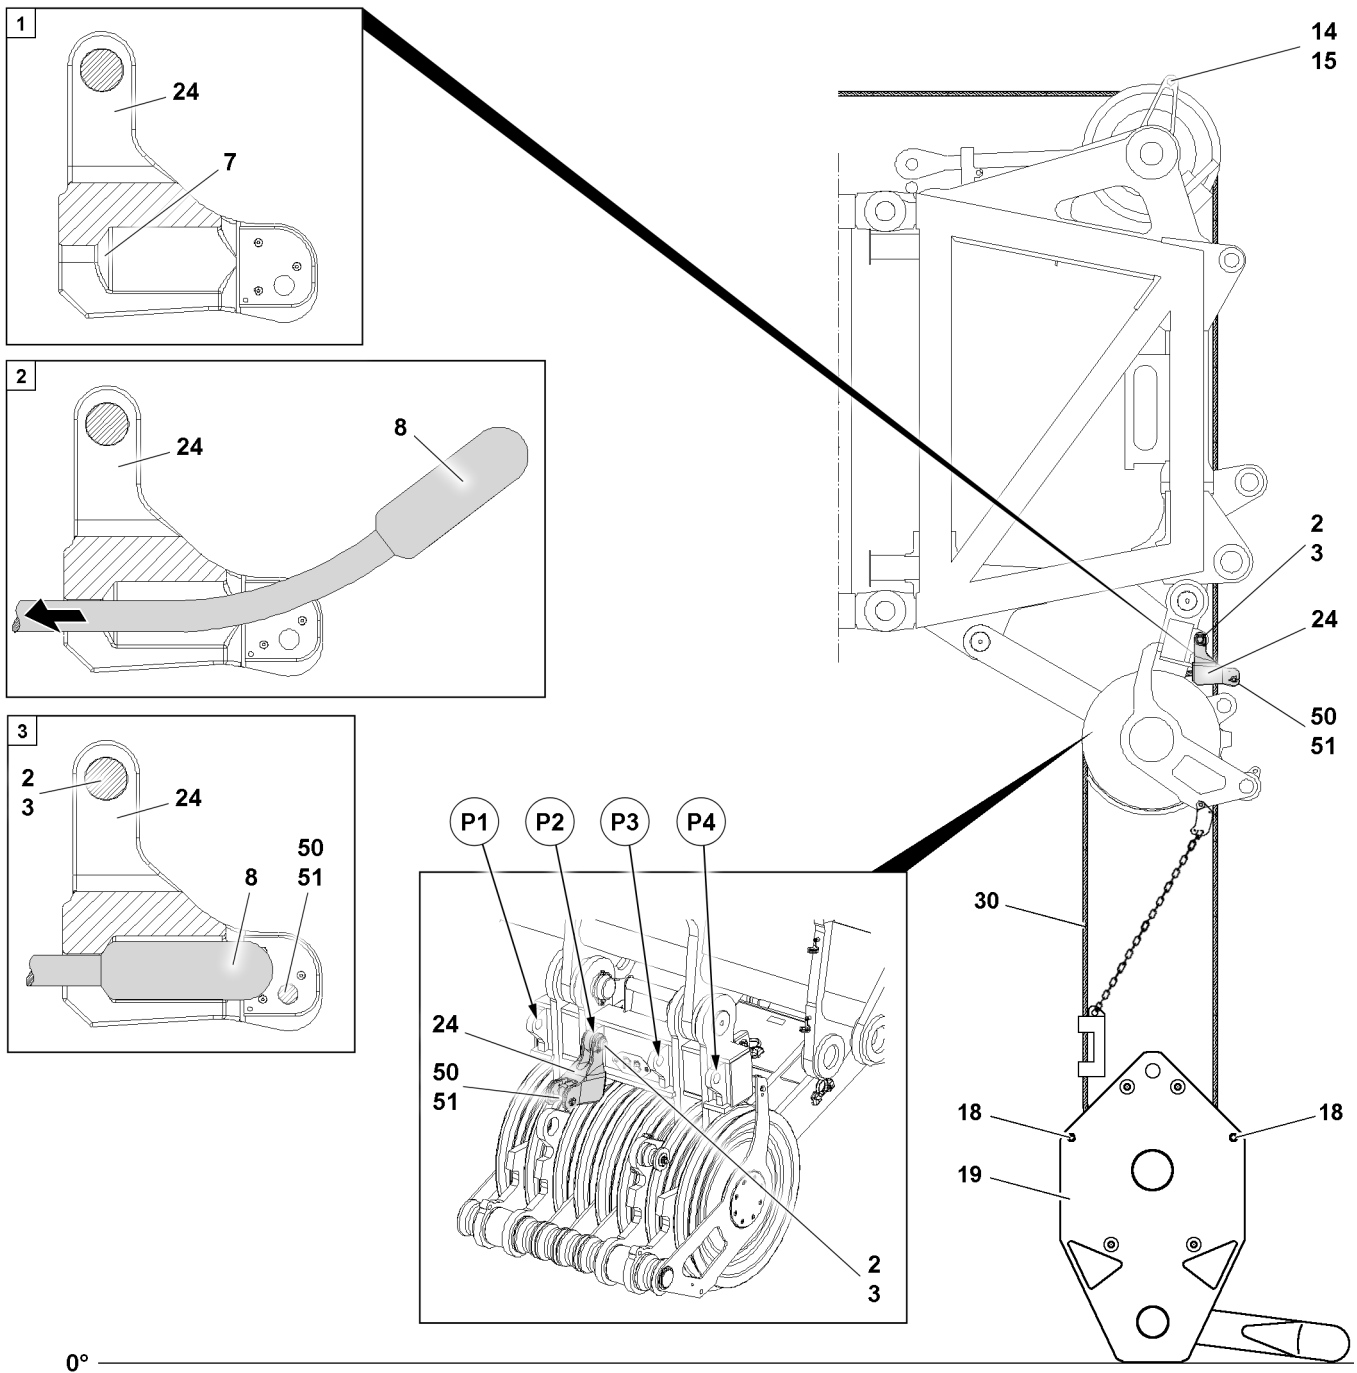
Details reeving hook block, L-shaped rope end connection 24
